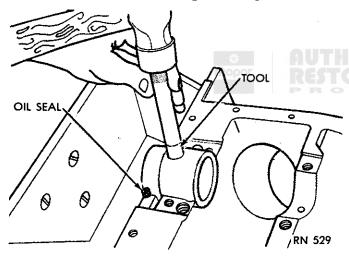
Installing Upper/Lower Oil Seal with Tool C-3511
